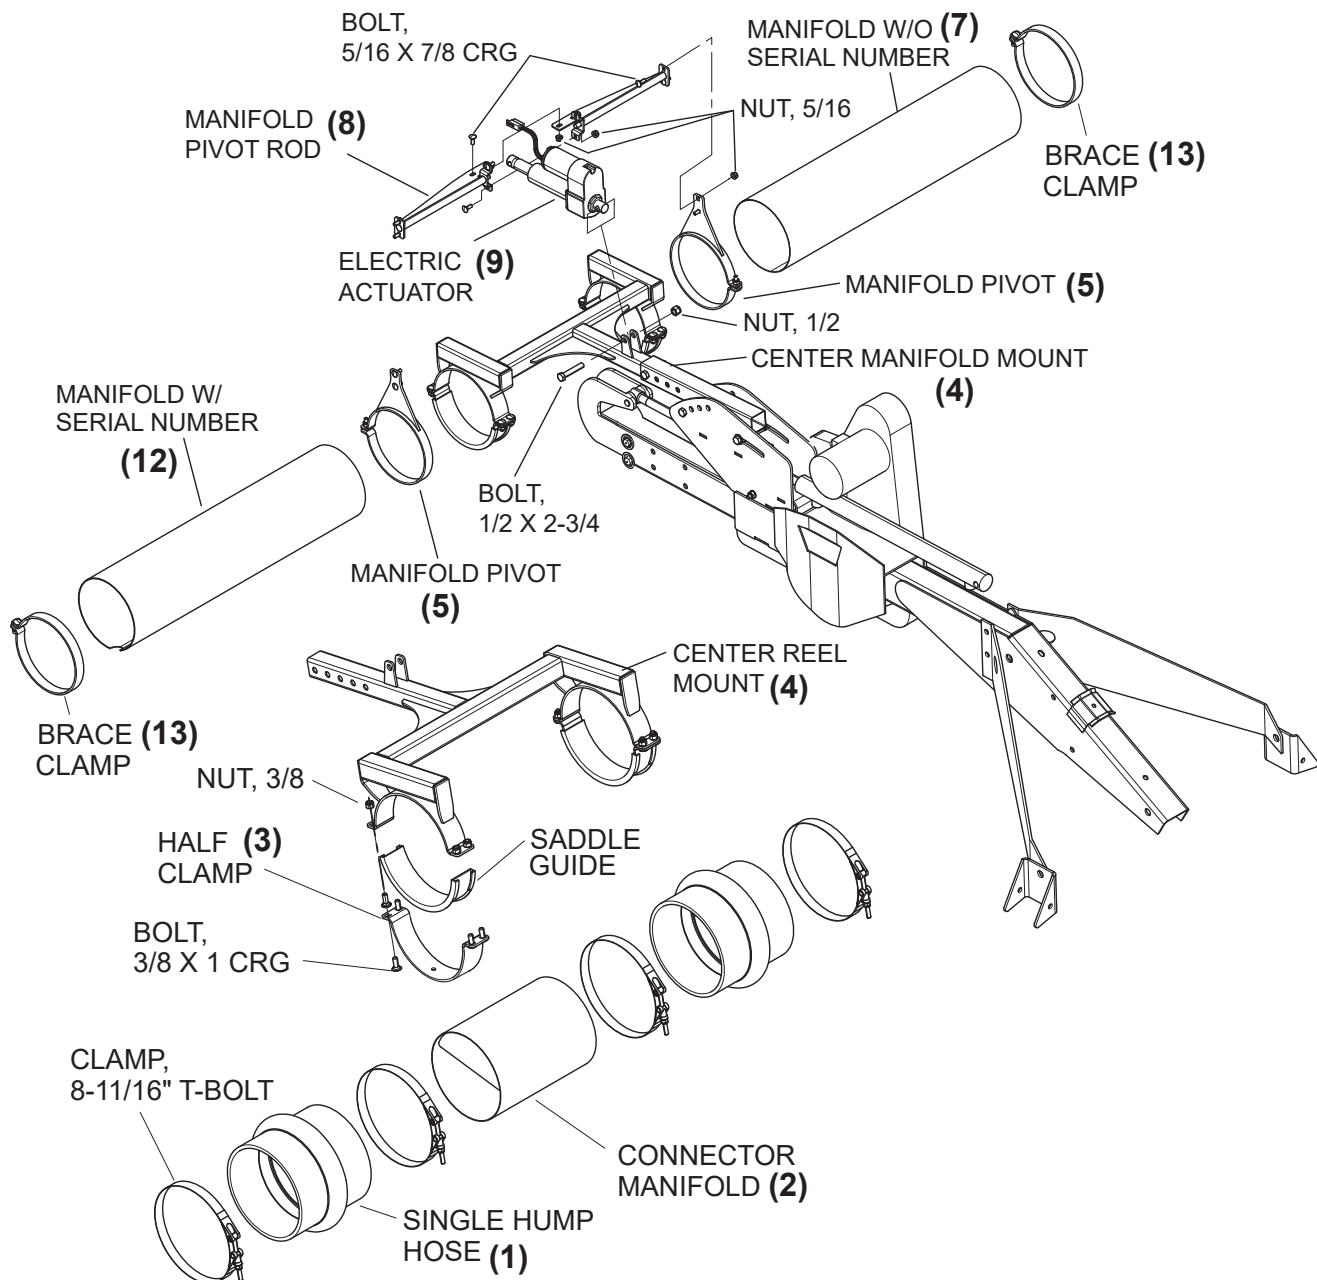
Center manifold Assembly (FD1 & FD75 headers)
